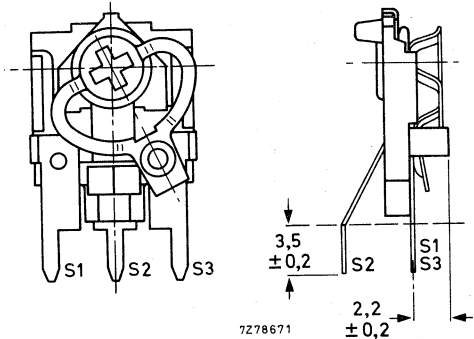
Test switch for horizontal mounting with adjustment knob at the side of the selector contact.
